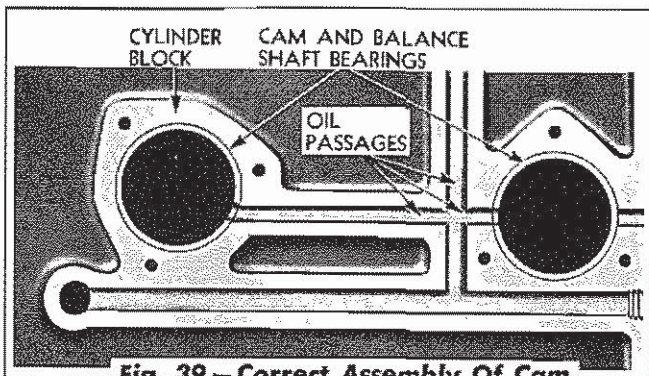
Correct Assembly Of Cam and Balancer Shaft Bearings
